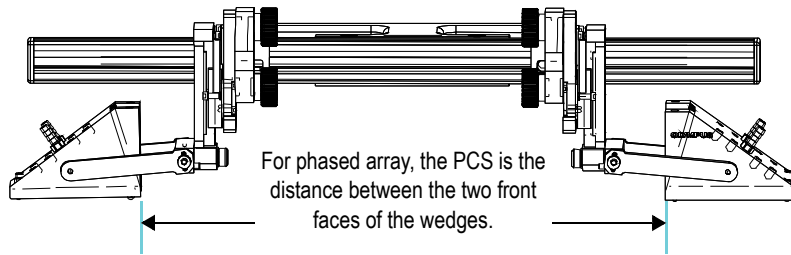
WeldROVER—PCS measurement for PA wedges
